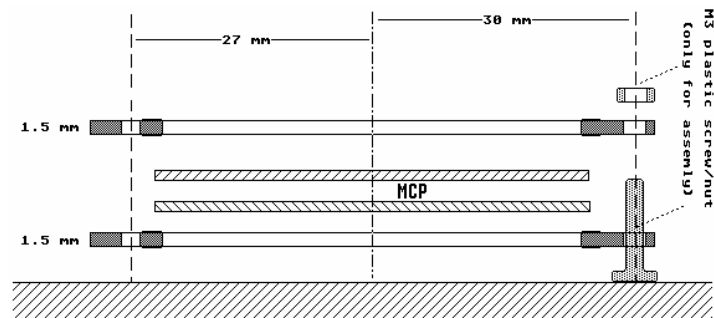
side view assembly step 1-3. Example is for chevron configuration
